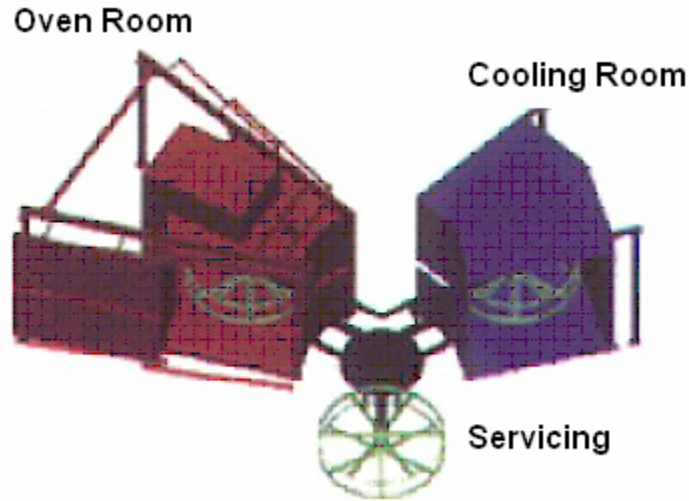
Simple top view of a rotational molding machine.⁴⁰
